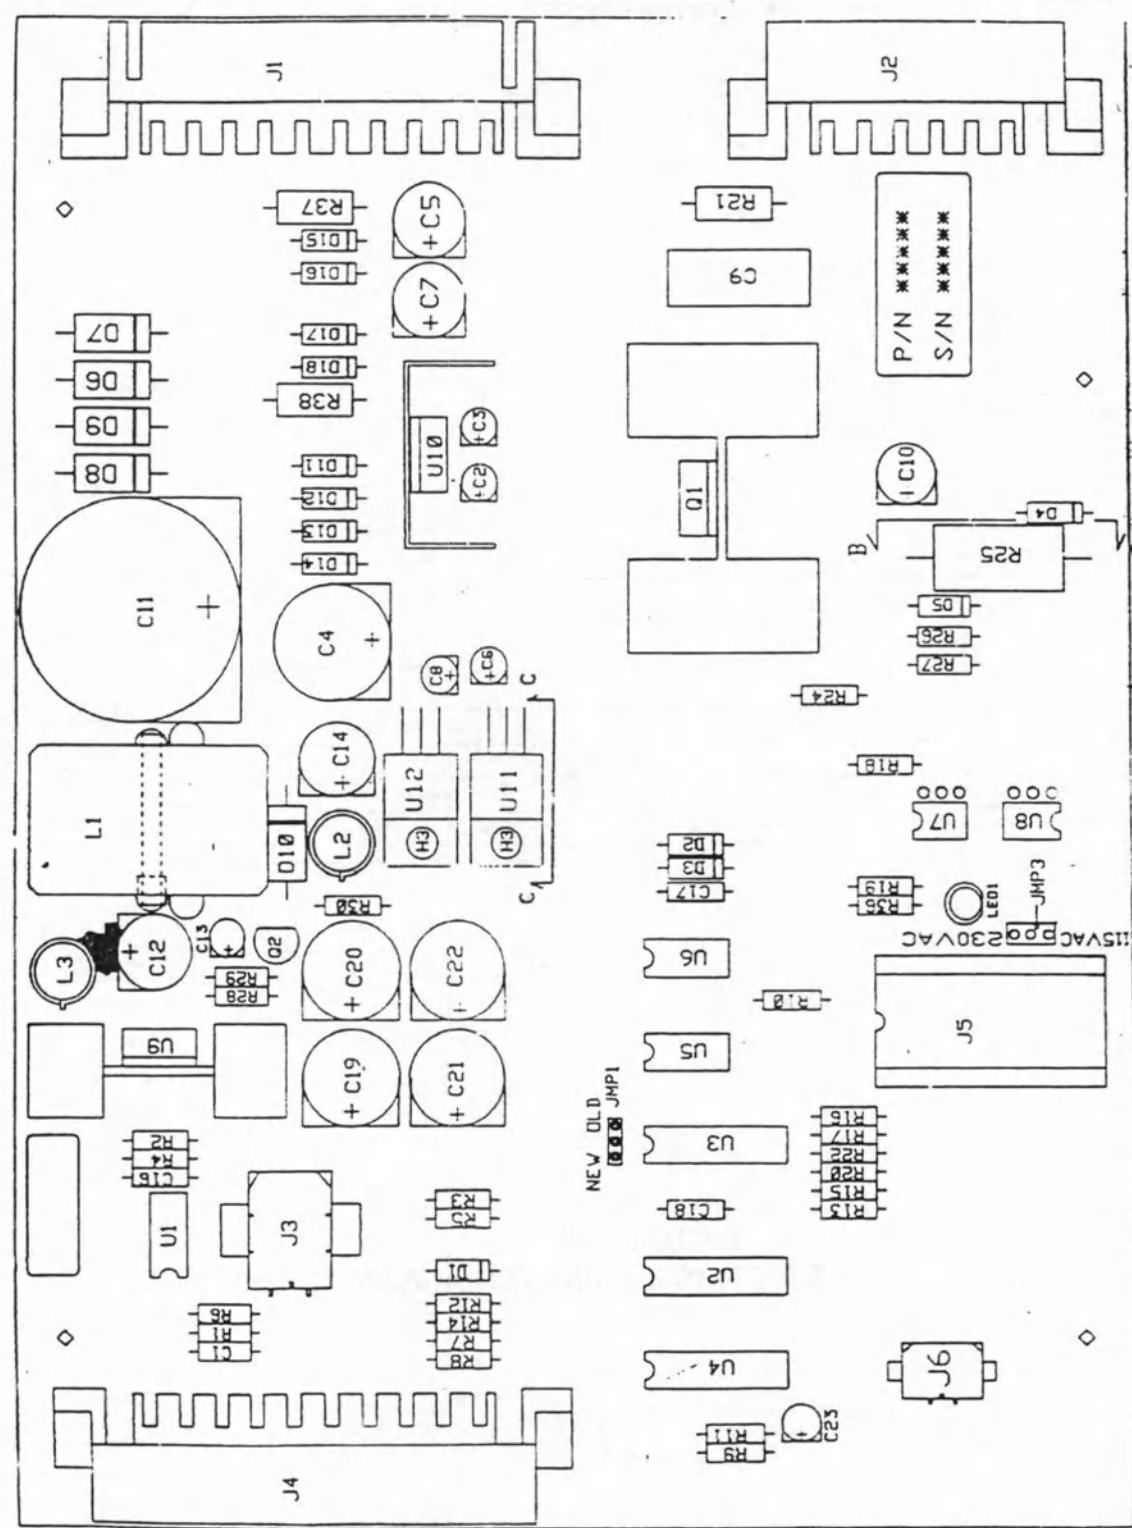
POWER SUPPLY BOARD - COMPONENT LAYOUT
